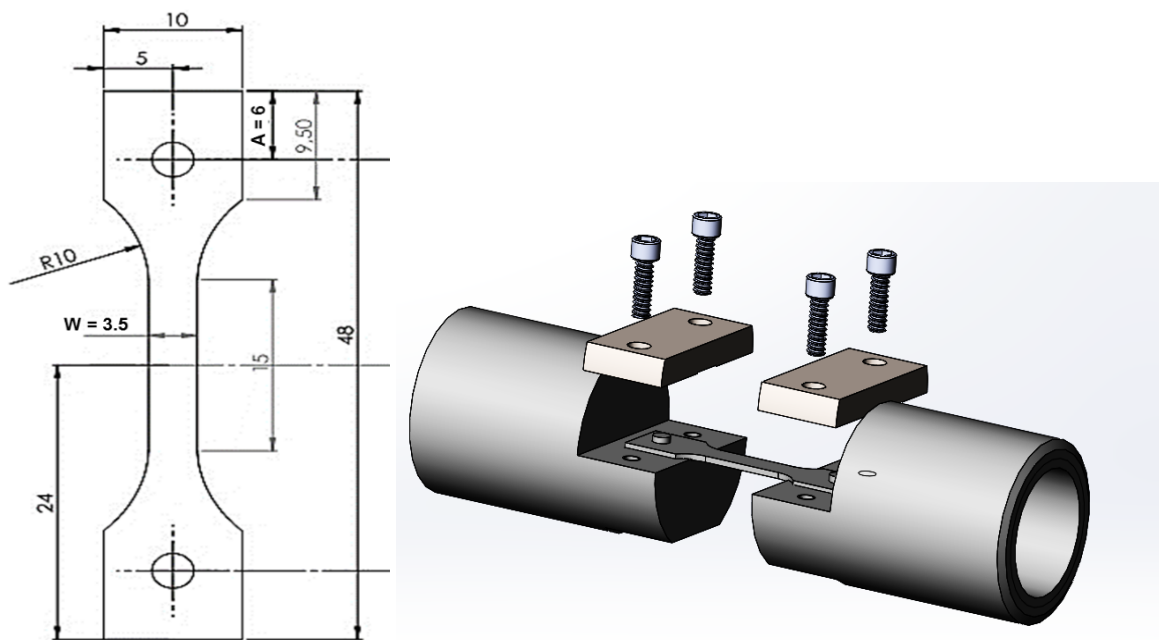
a) Geometry of the tensile test specimen and b) grip assembly.
